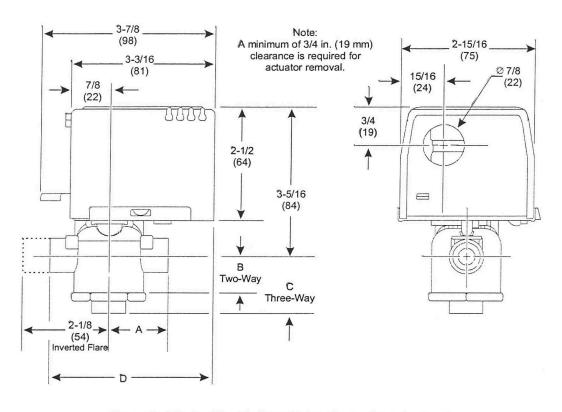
J Series Electric Zone Valve Dimensions, in. (mm)
